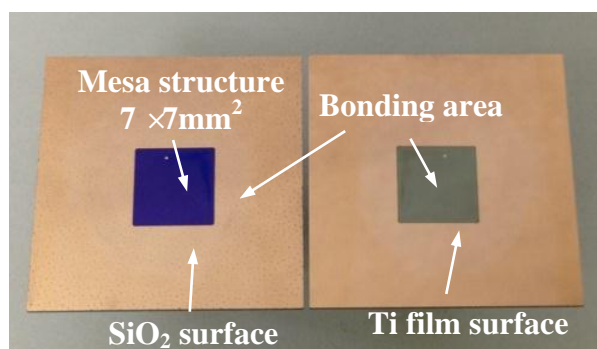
Fracture image of Cu/Cu bonding. This bonding sample is fractured from the interface between the thermal oxide layer and Ti film
